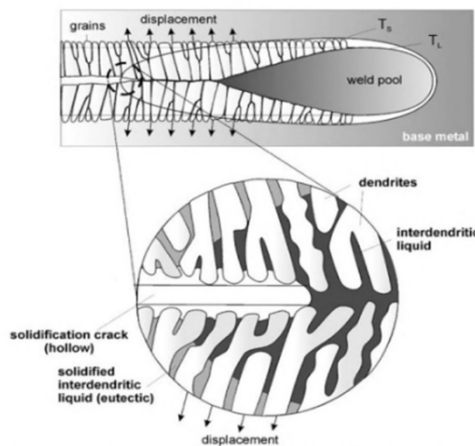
Mechanism of hot crack formation in a weld [5]
